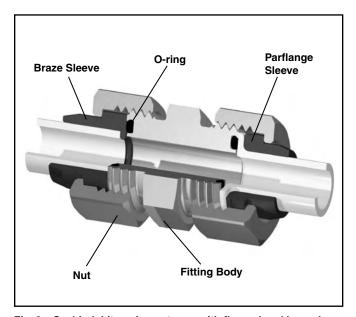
Seal-Lok Lite union cutaway with flanged and brazed assemblies
